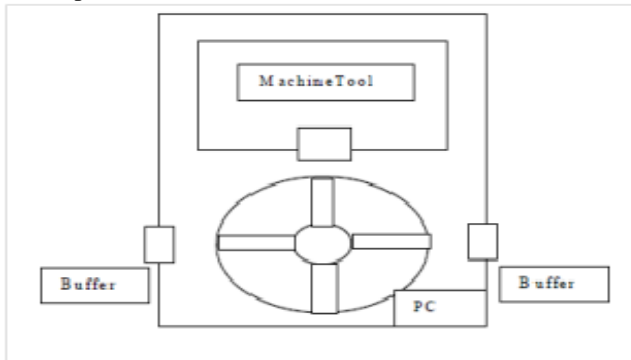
Schematic sketch of a work cell consisting of a pallet changer and a machine tool.
